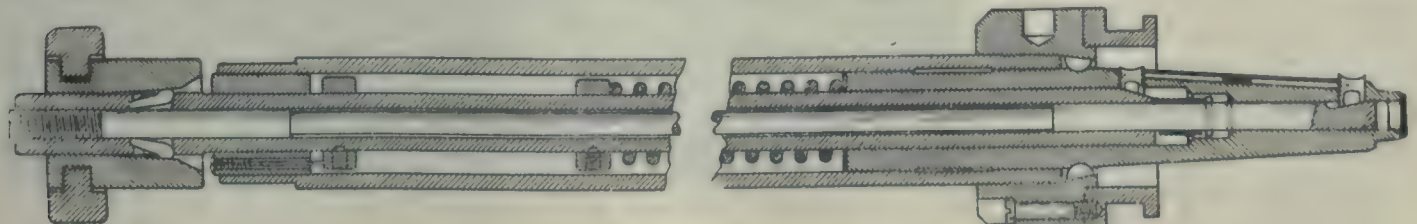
SECTIONAL VIEW OF EXPANDING CHUCK SHOWING DETAIL.
